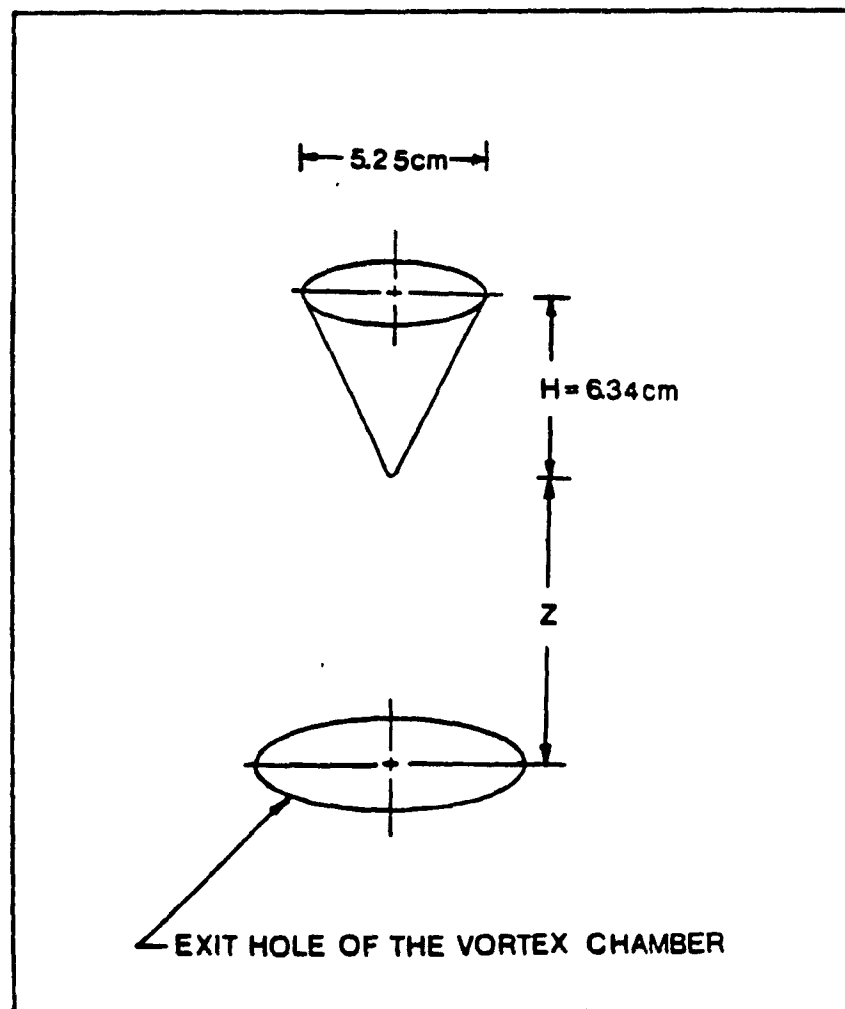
The Physical Dimensions of the Conical Plug
